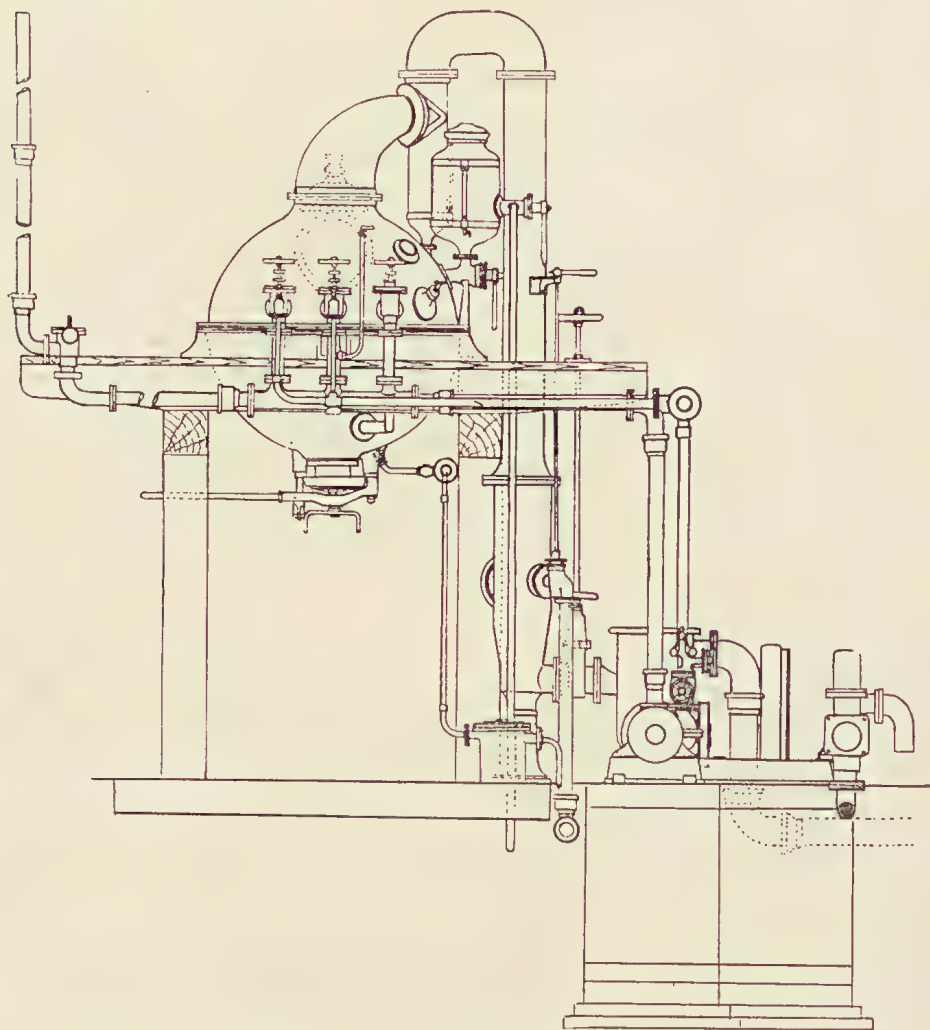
EARLY TYPE OF VACUUM PAN USED IN QUEENSLAND SUGAR MILLS.
